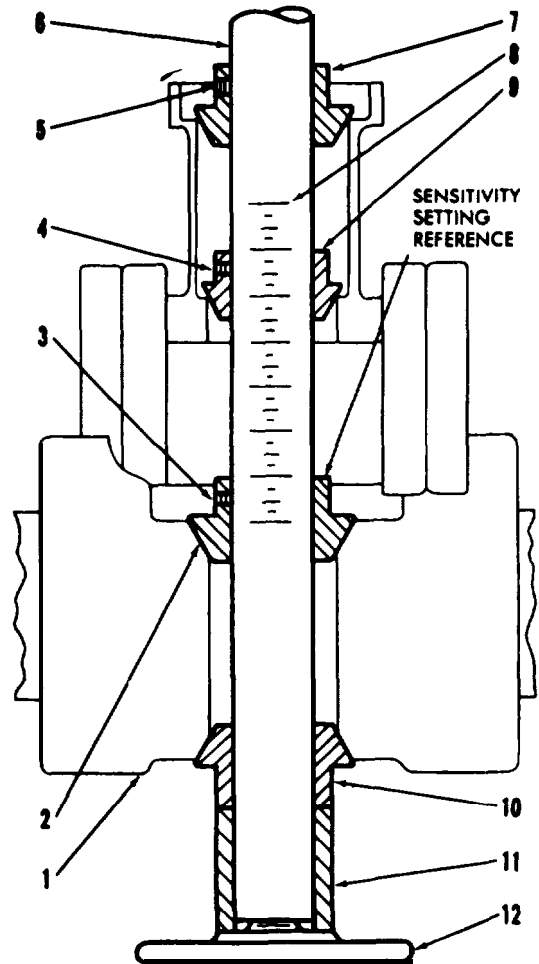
Typical Balancer Installation - Propeller Assemblies with Cylinders and Counterweights.
